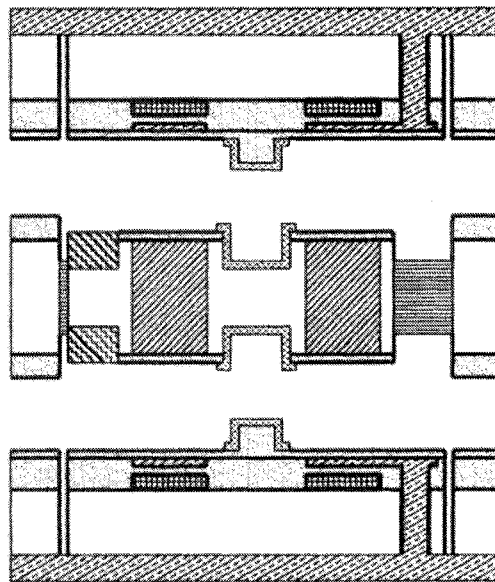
Assembly & Encapsulation step 1 – alignment of rotor and stators.
